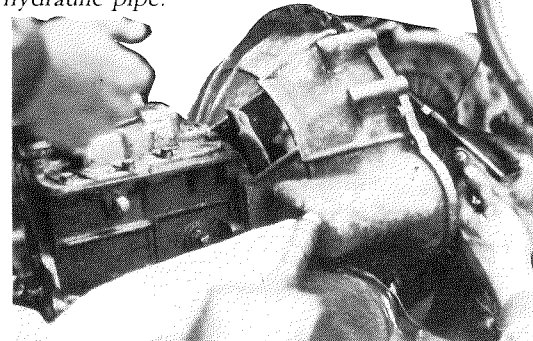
Jack up and take the weight off the engine under the sump (with a piece of wood in between) and pull the gearbox off the input splines. You may have to gently lever some of the trim over the bellhousing at this stage - hands and screwdriver bottom right.
